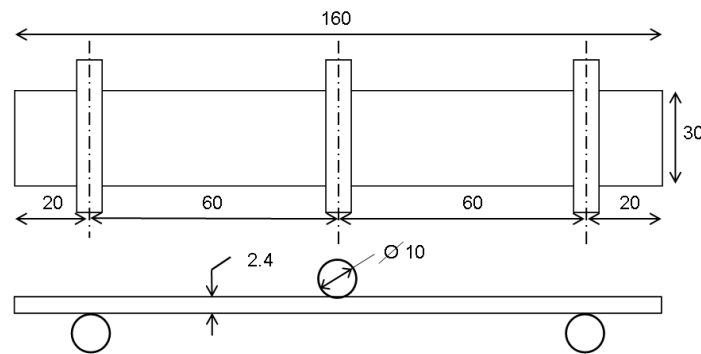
Dimensions of the used bending coupon in millimetres.
